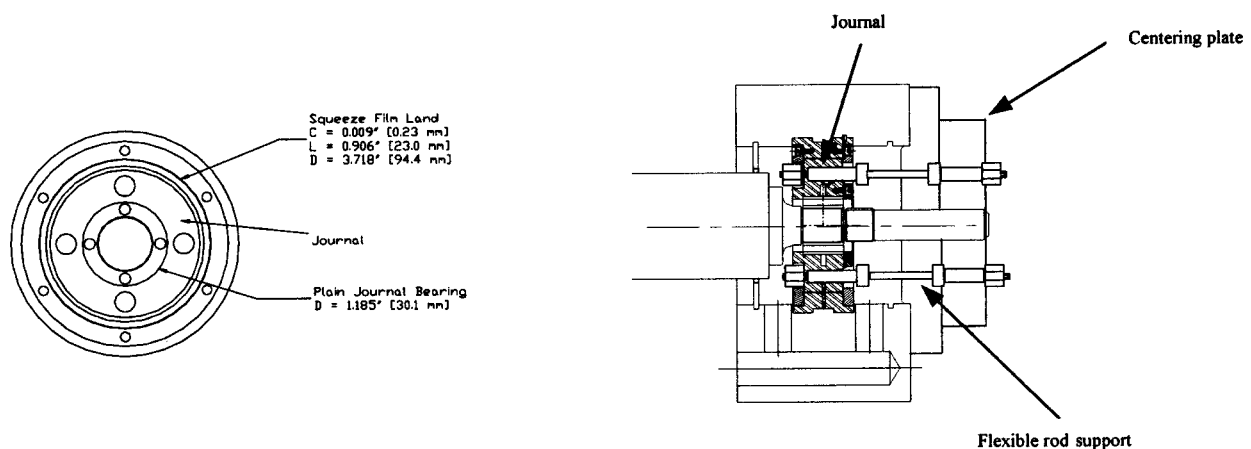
Configuration and main dimensions of cylindrical squeeze film damper and plain journal bearing
